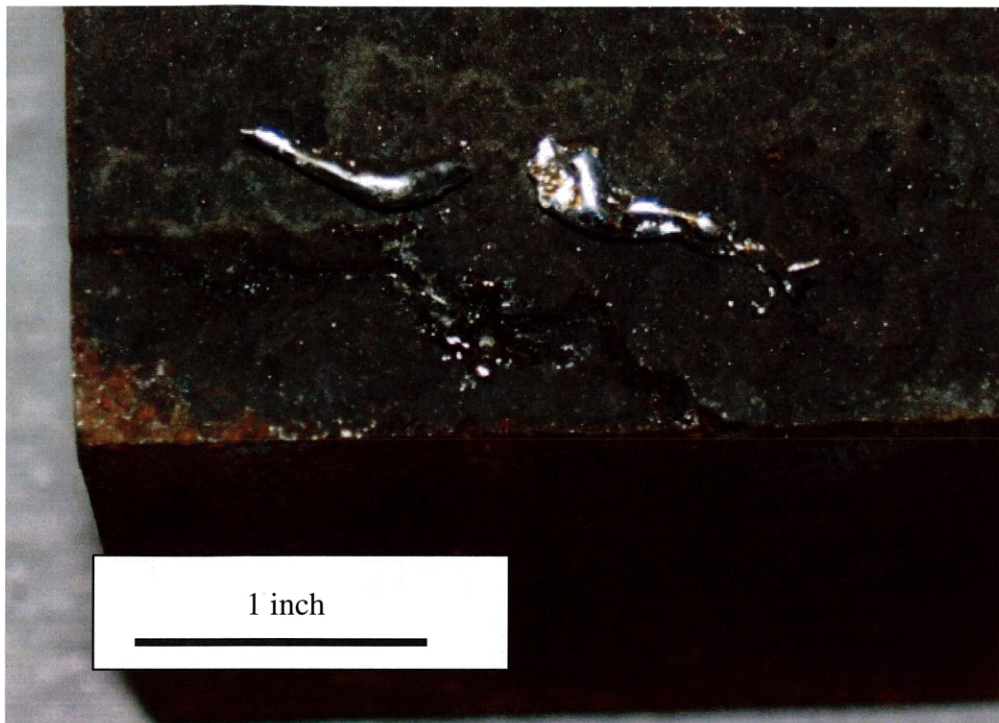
Solder cast removed from crack and shown inverted, cast shows lack of penetration into crack root and poor replication of crack morphology
